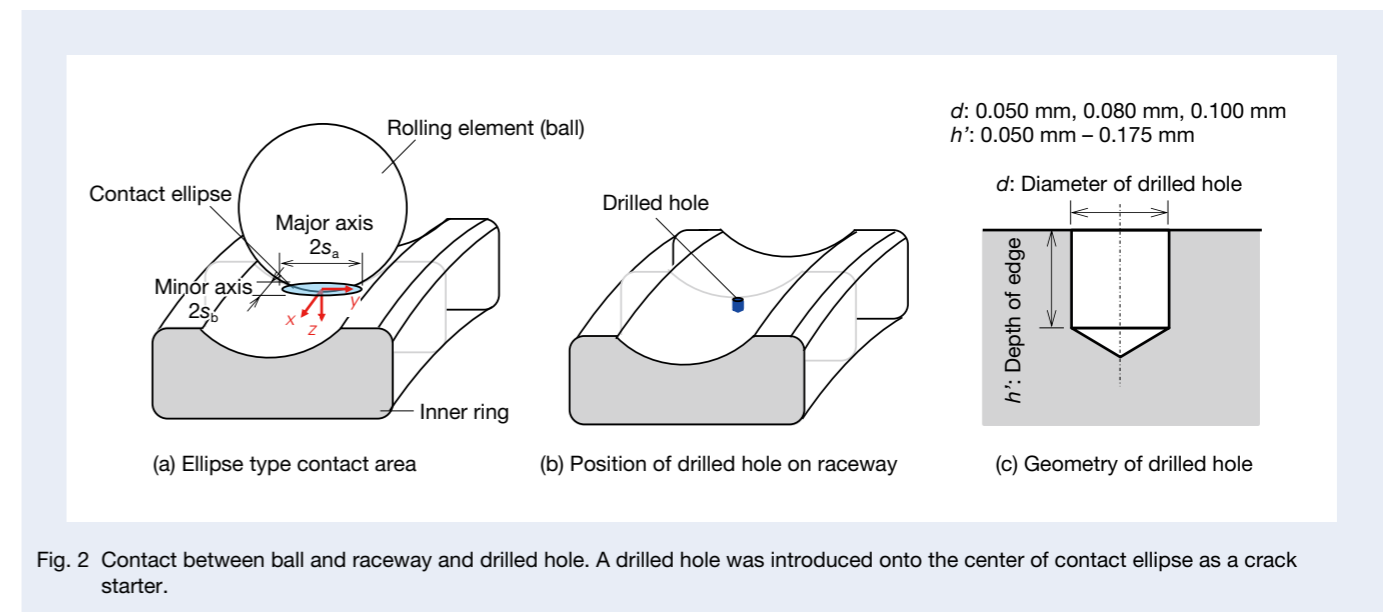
Contact between ball and raceway and drilled hole. A drilled hole was introduced onto the center of contact ellipse as a crack starter.
